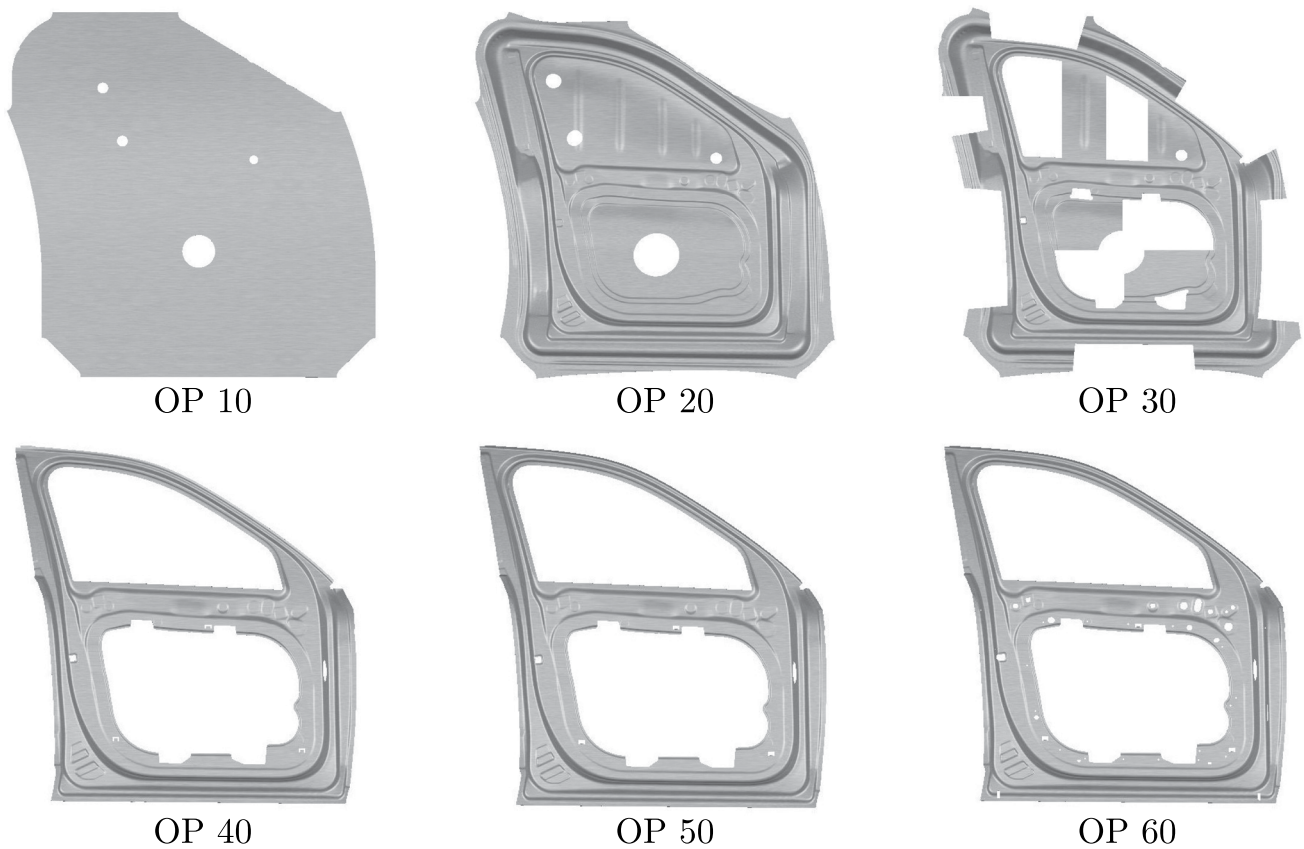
Steps of the sheet metal forming process to manufacture the Volvo XC90 inner front door component
